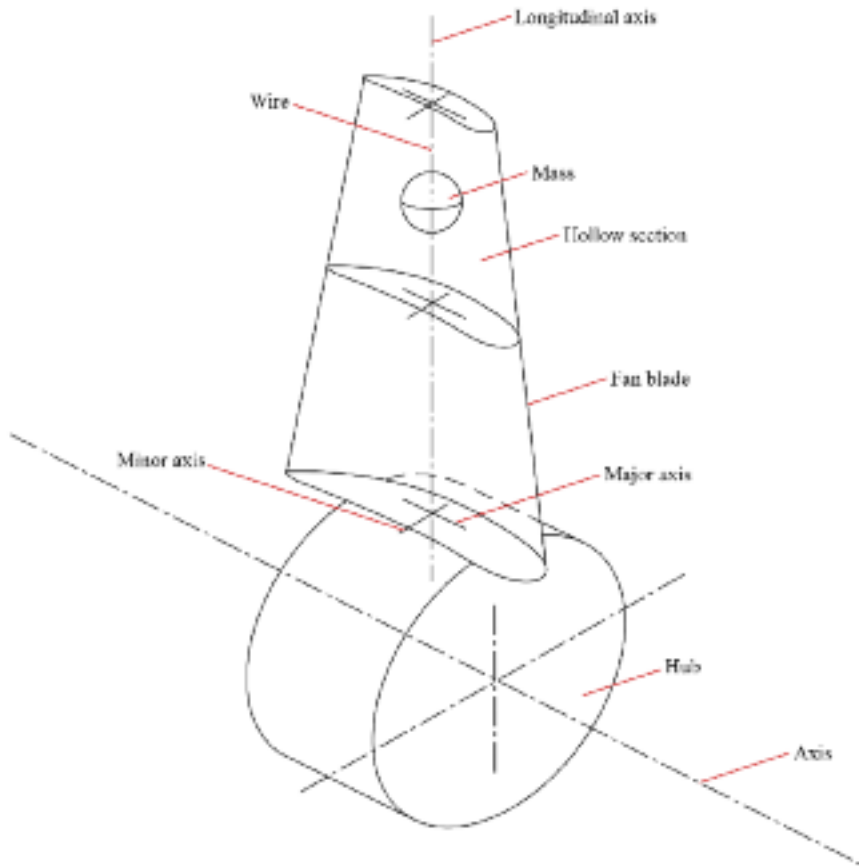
A schematic view of one axial fan blade, illustrating the mass' location used to increase blade damping.
